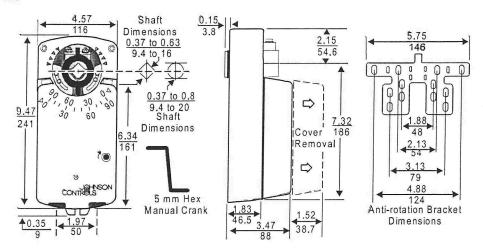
Actuator, Anti-rotation Bracket, and Manual Crank Dimensions, in. (mm)
